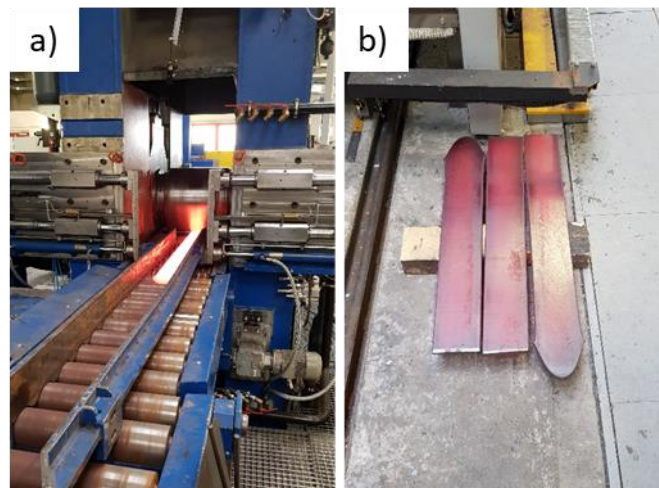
Rolled product passing through the rolling mill (a); rolled product 13 mm in thickness cut into three parts (b).
